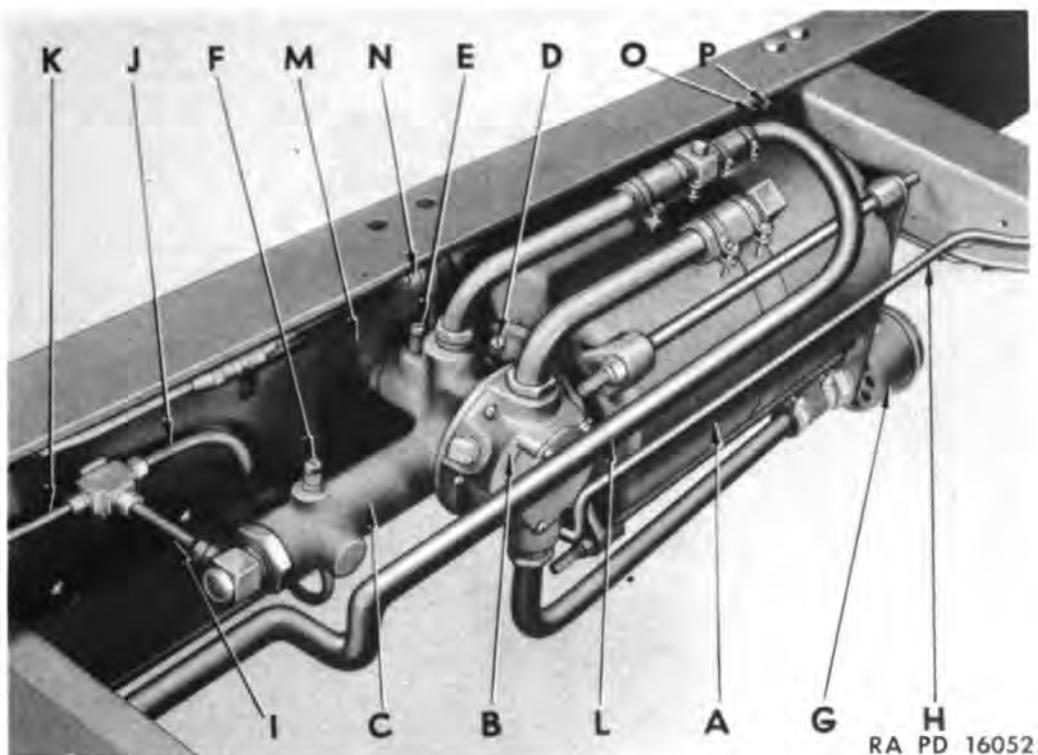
Brake Hydrovac Unit, Air Cleaner, Vacuum and Hydraulic Lines Installation
